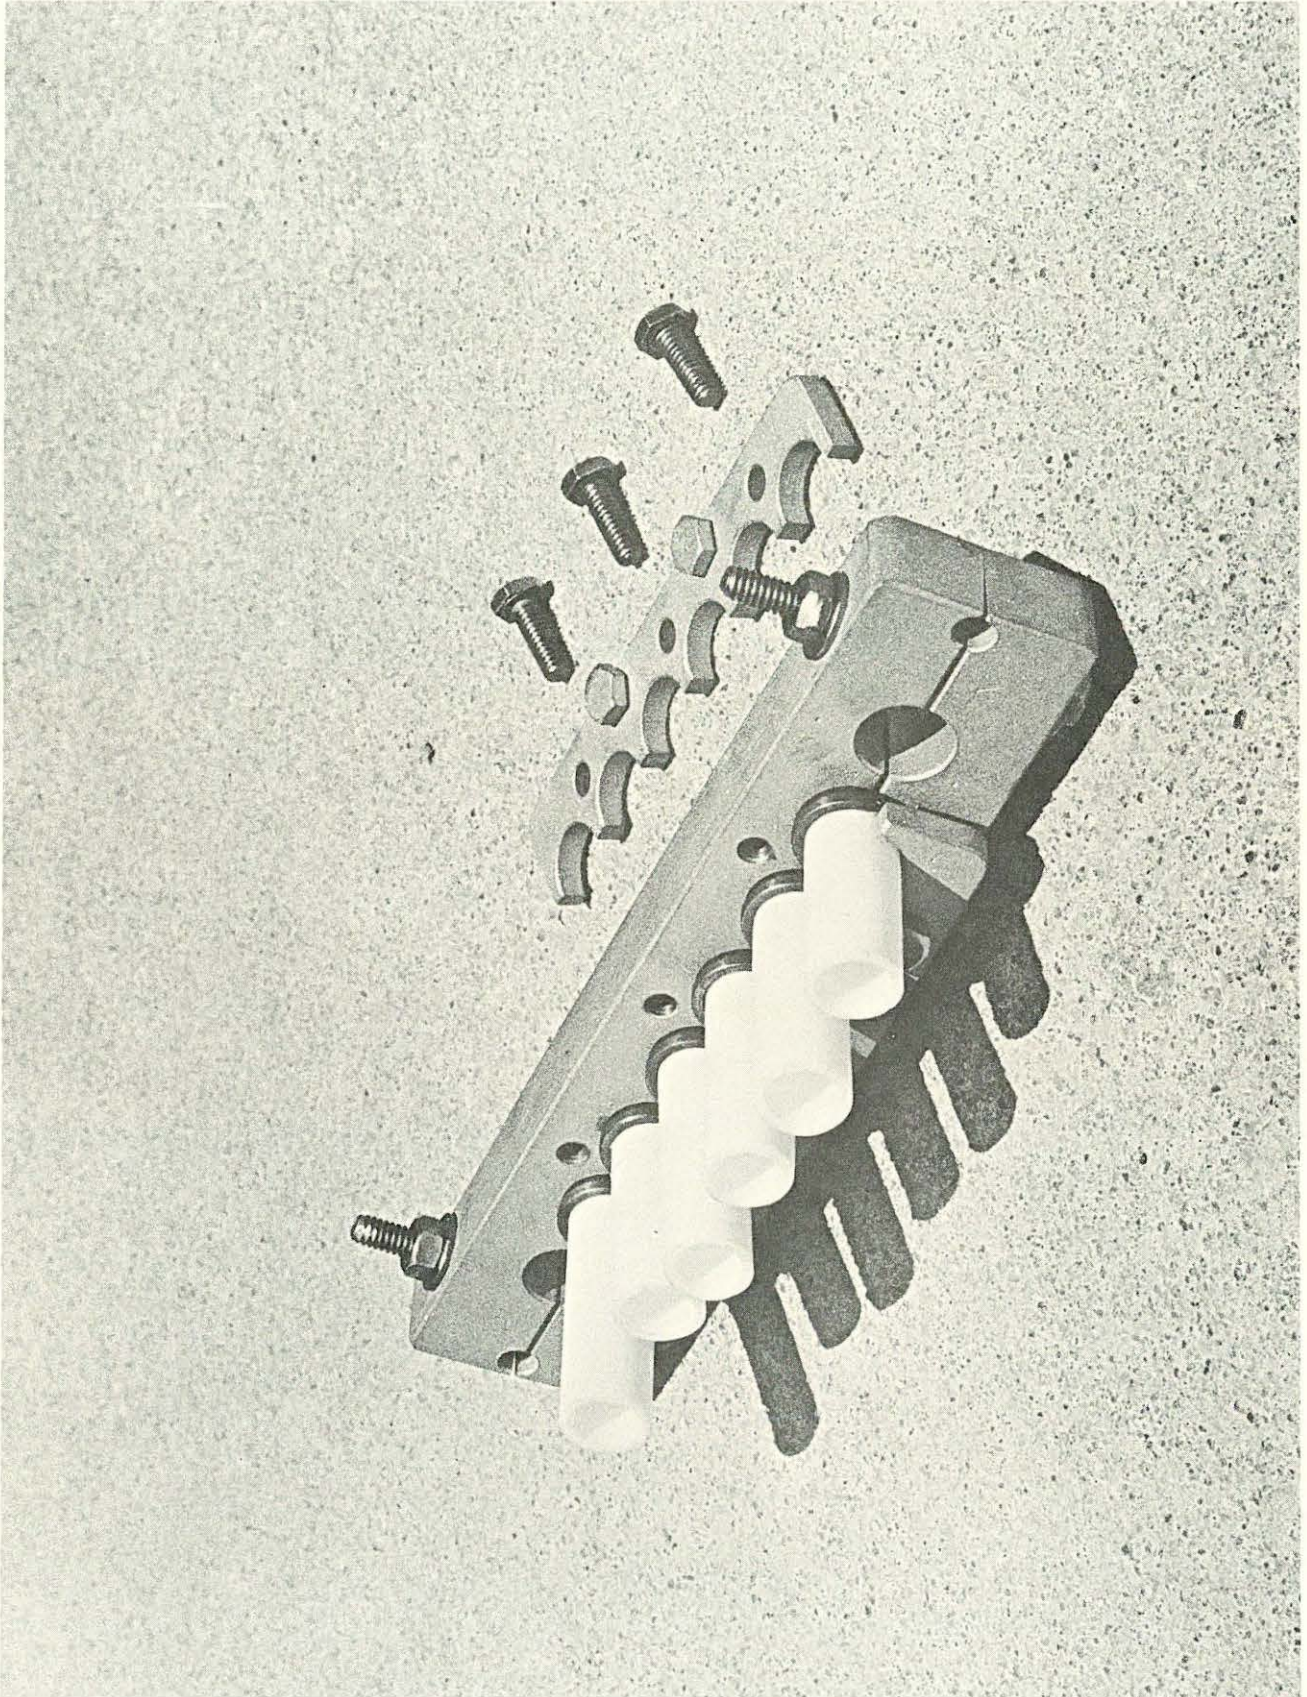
Partially Assembled View of Teflon Tube Lock Bar
